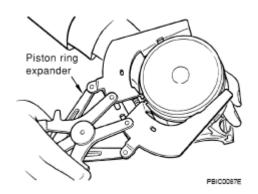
Identifying Piston Rings Expander Courtesy of NISSAN MOTOR CO., U.S.A.
